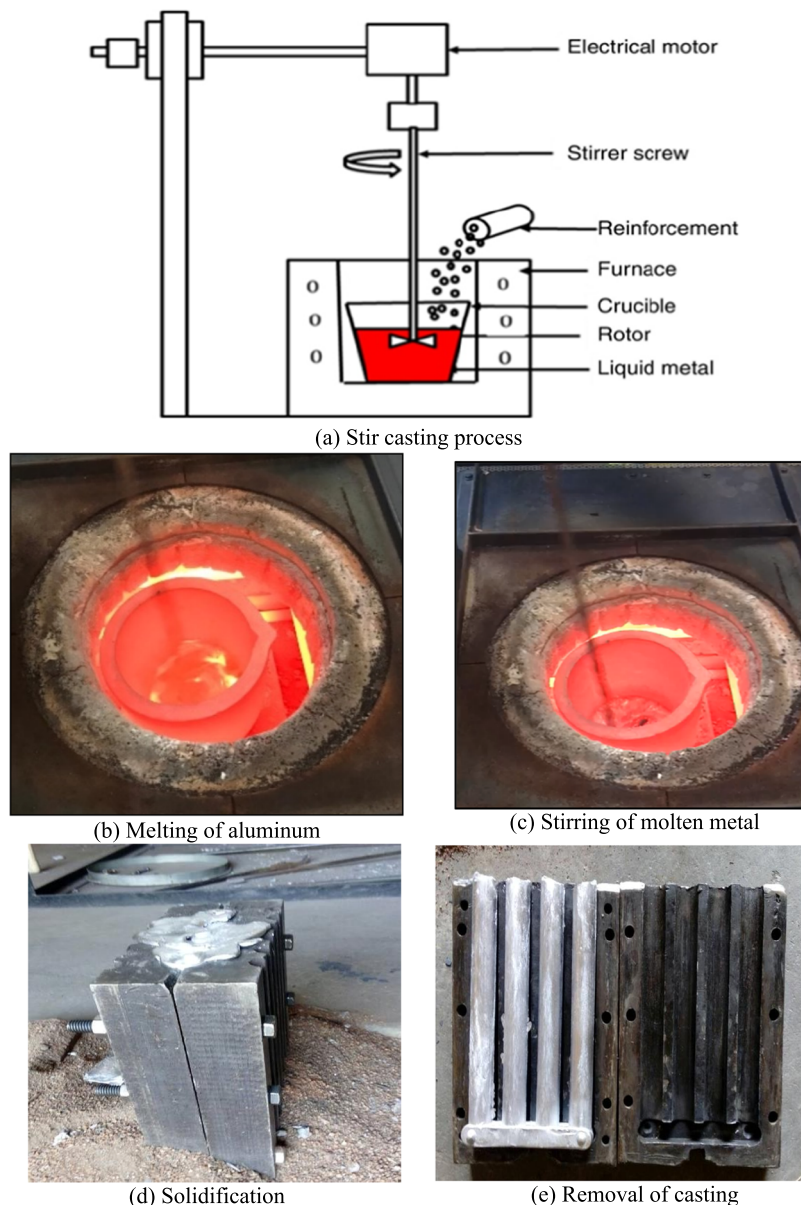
(a) Schematic of stir-casting setup, (b) melting of aluminum, (c) stirring of molten metal, (d) solidification, and (e) removal of casting ("Photograph courtesy of 'R, Babu E' Copyright 2023/2024").
